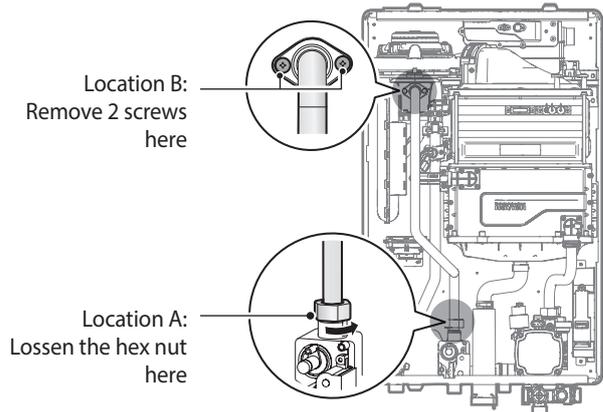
Detaching Gas Inlet Pipe from Gas Valve and Fan Motor Assembly (NCB-24/28/34LDWE, NCB-20/24/28LHWE)
